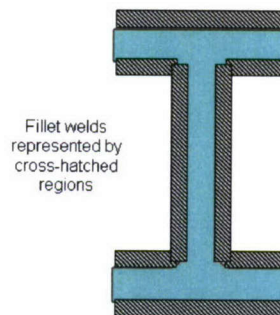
Locations of I-Beam-to-Adapter-Plate Fillet Welds
